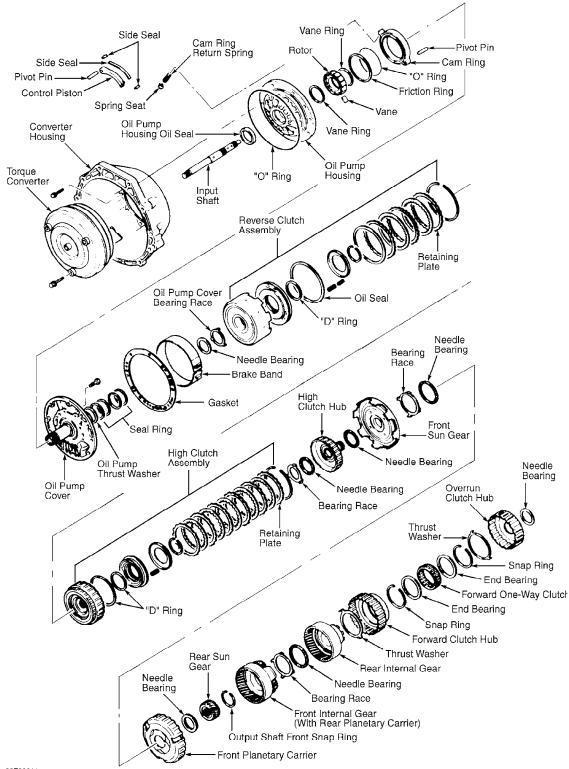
Exploded View Of A/T Components (RE4R01A, RE4R03A & RL4R01A) Courtesy of Nissan Motor Co., U.S.A.
